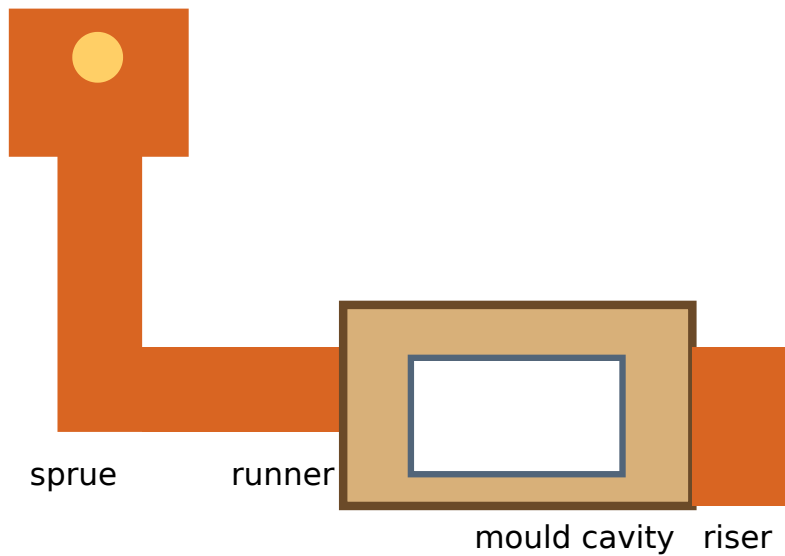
Moulding tools and components. Reproduce the essential parts, labels and arrows in examination drawings.
